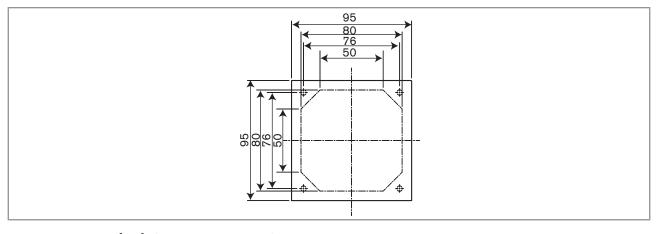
Dimensions [mm] of the electrical cabinet frontage cutting plan
